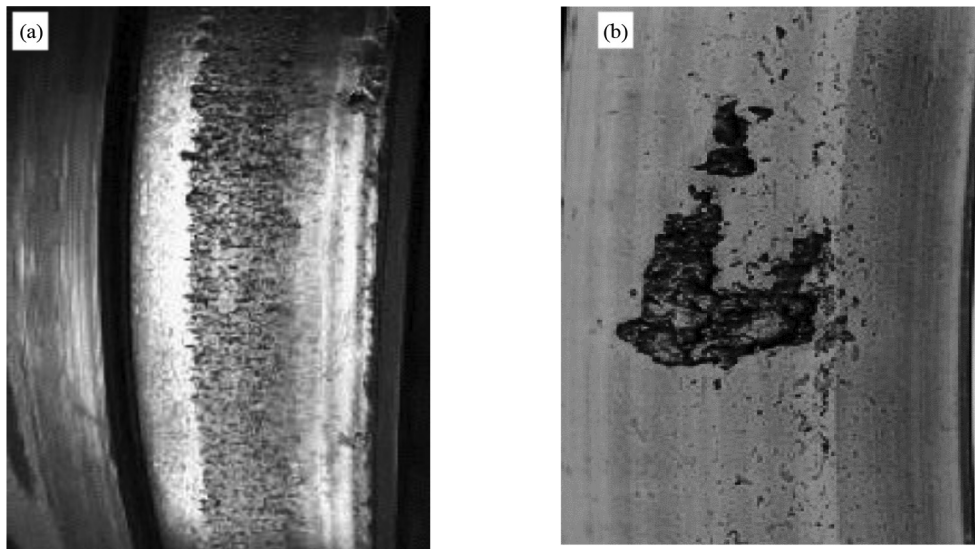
(a) closer look at the Inner race defect caused under continuous load. (b) sharp impact caused in the outer race of the ball bearing.
